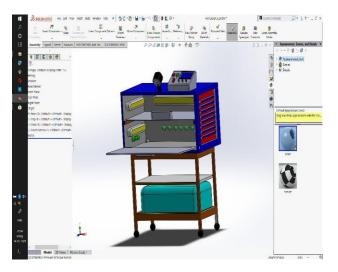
Inner placement view of Multipurpose Sanitization Chamber
